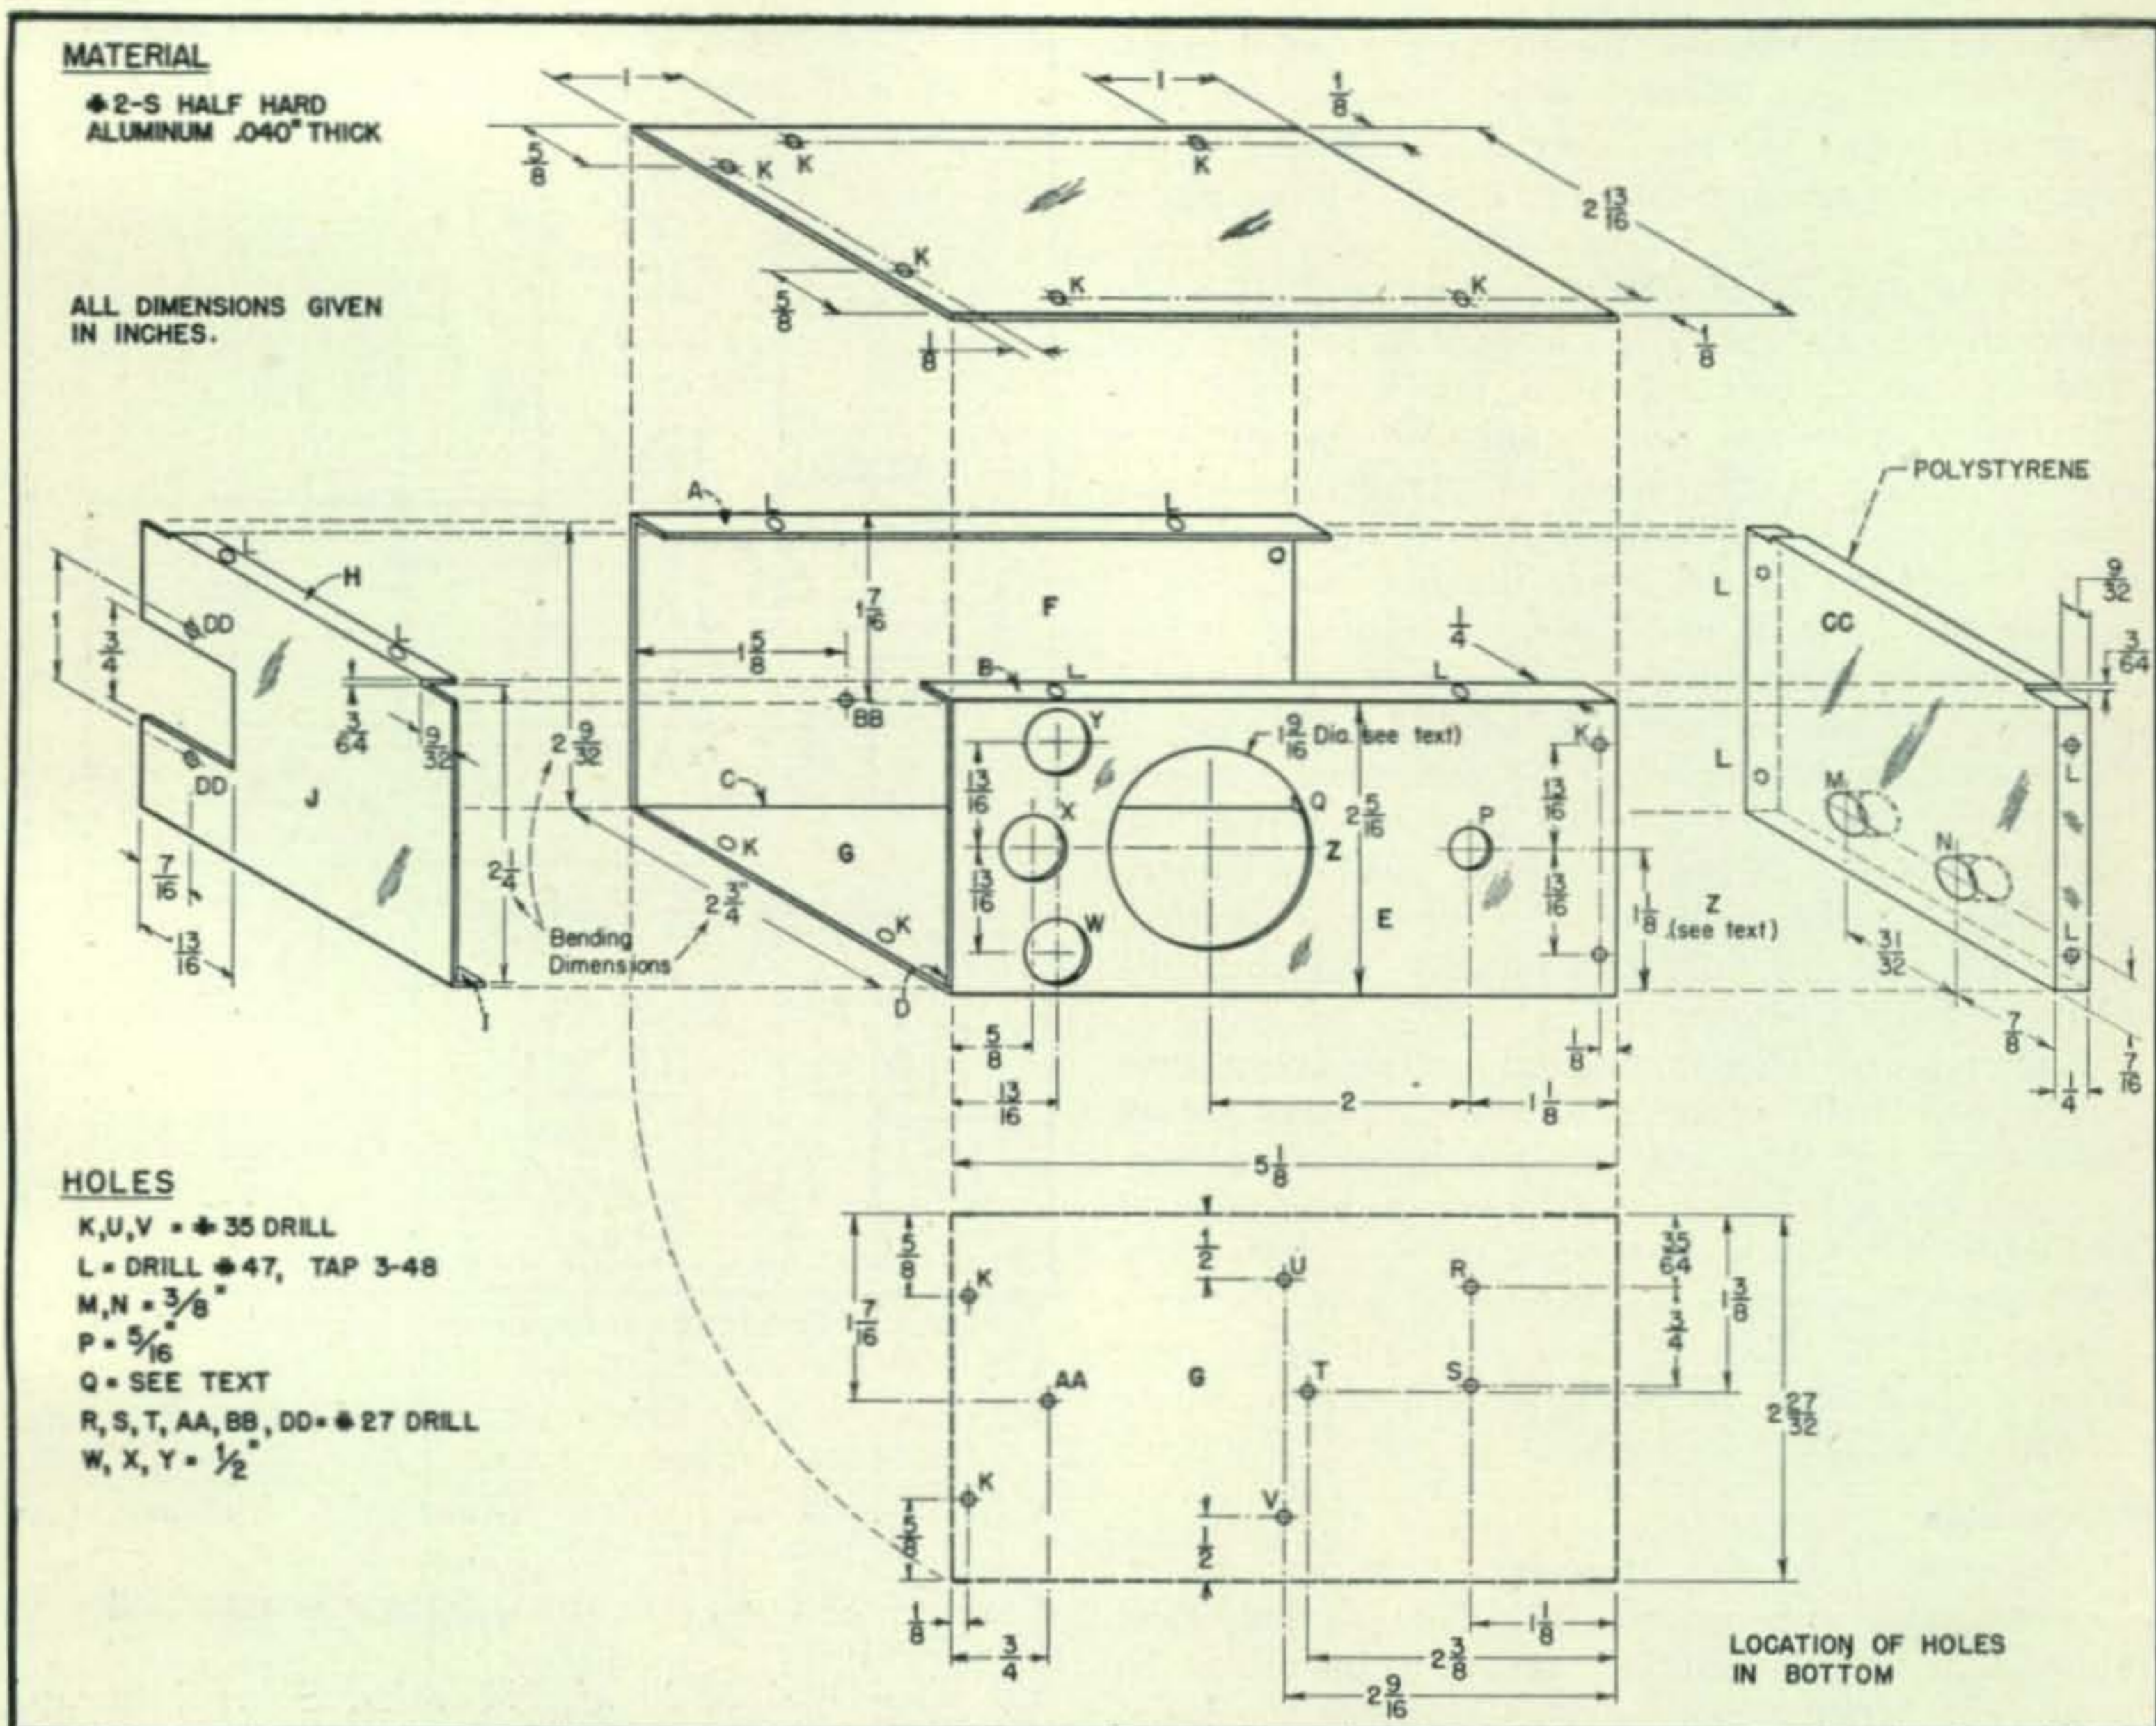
Mechanical drawing of the specially constructed Dipper case.
